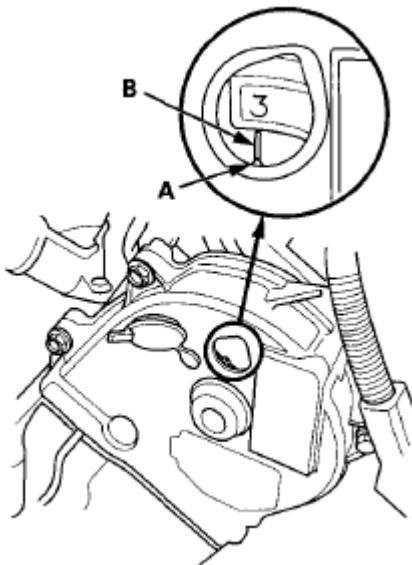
Identifying Pointer And TDC Mark On Piston No. 3
